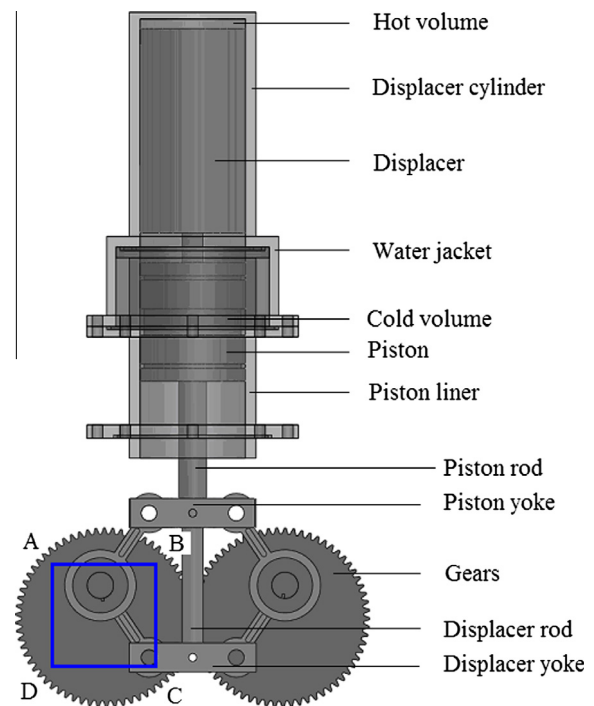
Beta type Stirling engine with rhombic-drive mechanism.
